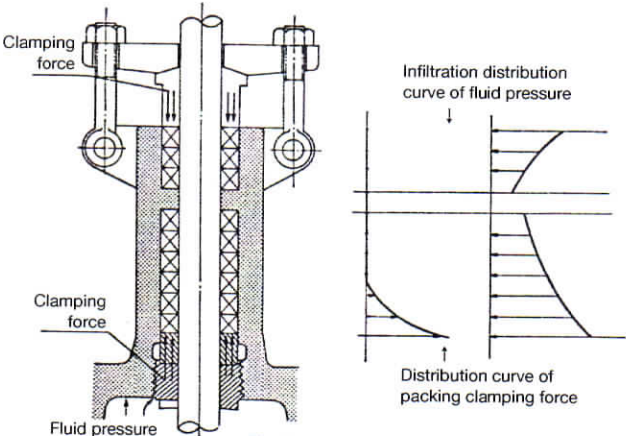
STUFFING BOX OF INTERIOR-CLAMPED-GLAND TYPE VALVE
